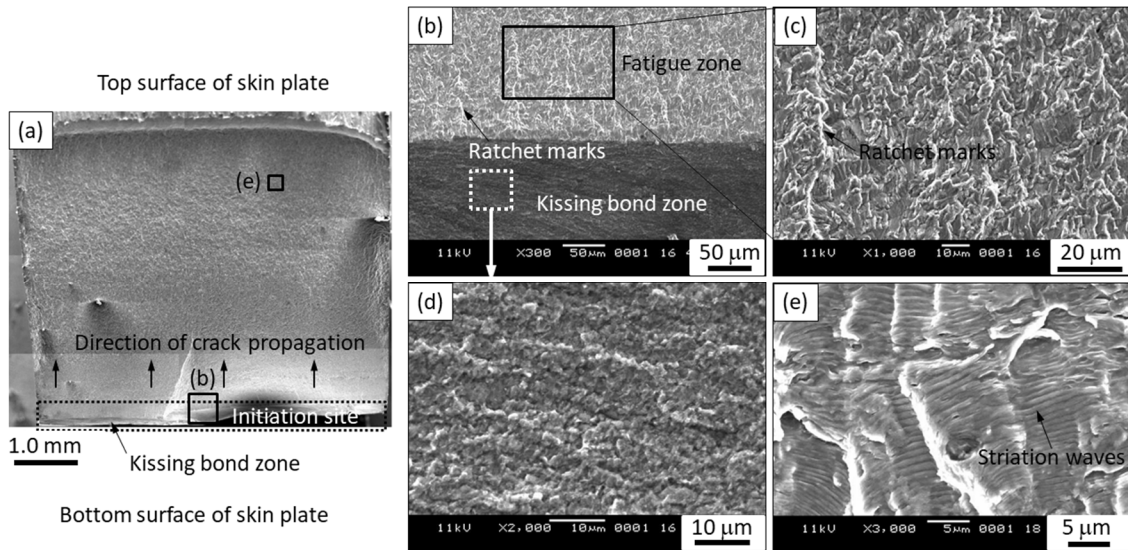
Fracture morphology of specimen S16 cracked at KB-RS2 under stringer fatigue test.
